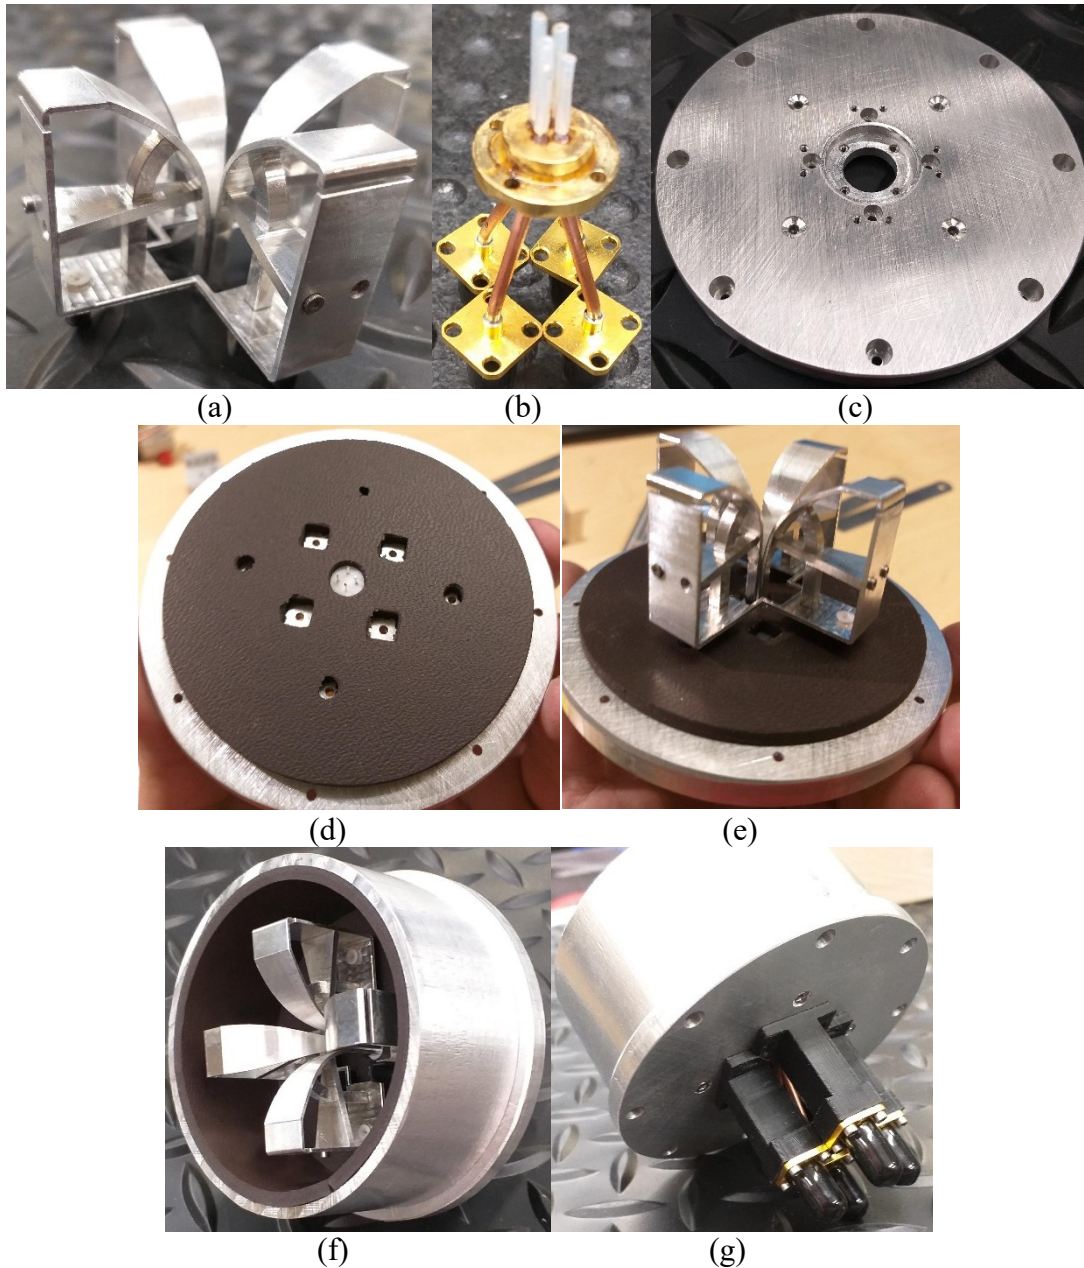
Steps of manufacture, read sequentially left to right, top to bottom. Assembly of main radiating element from individual arms (a). Integration and soldering of cable feeds into brass mounting structure (b). Preparation of ground plane (c) and integration of brass mounting structure and absorber layer (d). Integration of ground plane structure with 3D printed standoffs and radiating element (e). Integration of cavity wall and absorber lining (f). And finally addition of 3D printed cable supports (g).
